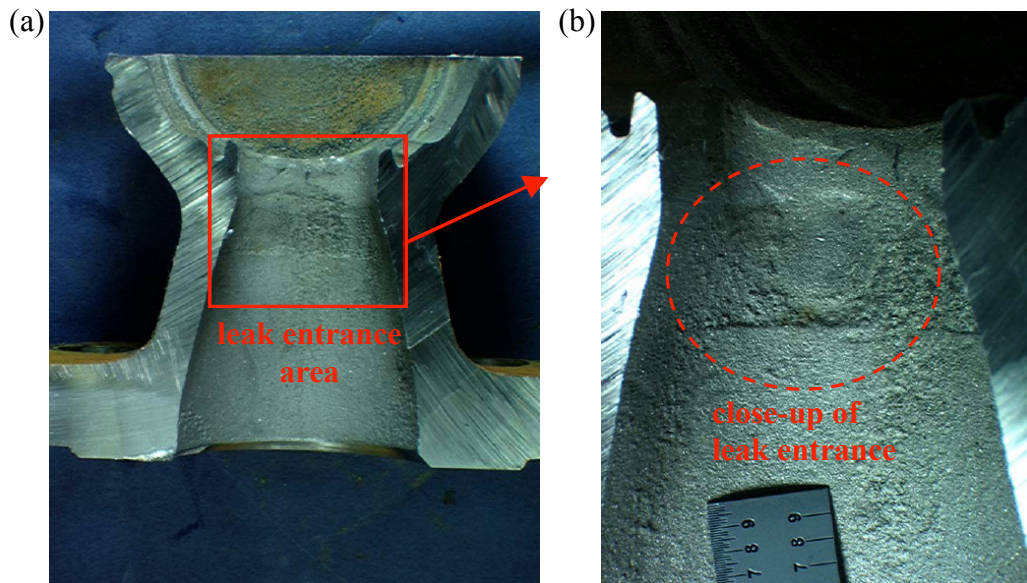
Photographs showing the entrance location of the leak: (a) view of valve section containing leak; and (b) a close-up of leak entrance location.
